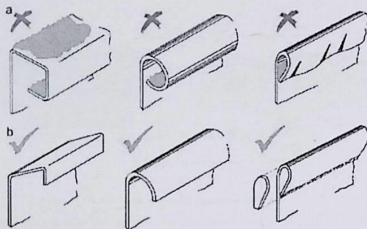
Top rims may impart rigidity to the construction. (a) However, a rim with an upper horizontal part provides a surface where debris may collect. When the rolled-over part of the rim is badly designed, it may provide a ledge where product debris can lodge. This soil can indirectly affect the product. (b) Open top rims must be rounded in a way that at one side the product drains back in the bulk of the product, while the more exterior part of the rim must allow drainage to the outside. Where preference is given to closed top rims, the top rim should be welded correctly to the wall over its full length. The weld must be flush and polished to provide a smooth surface and the rim must be totally closed. Any holes, therefore, must be sealed by welding or by fitting sealed caps (CFPRA, 1983).
